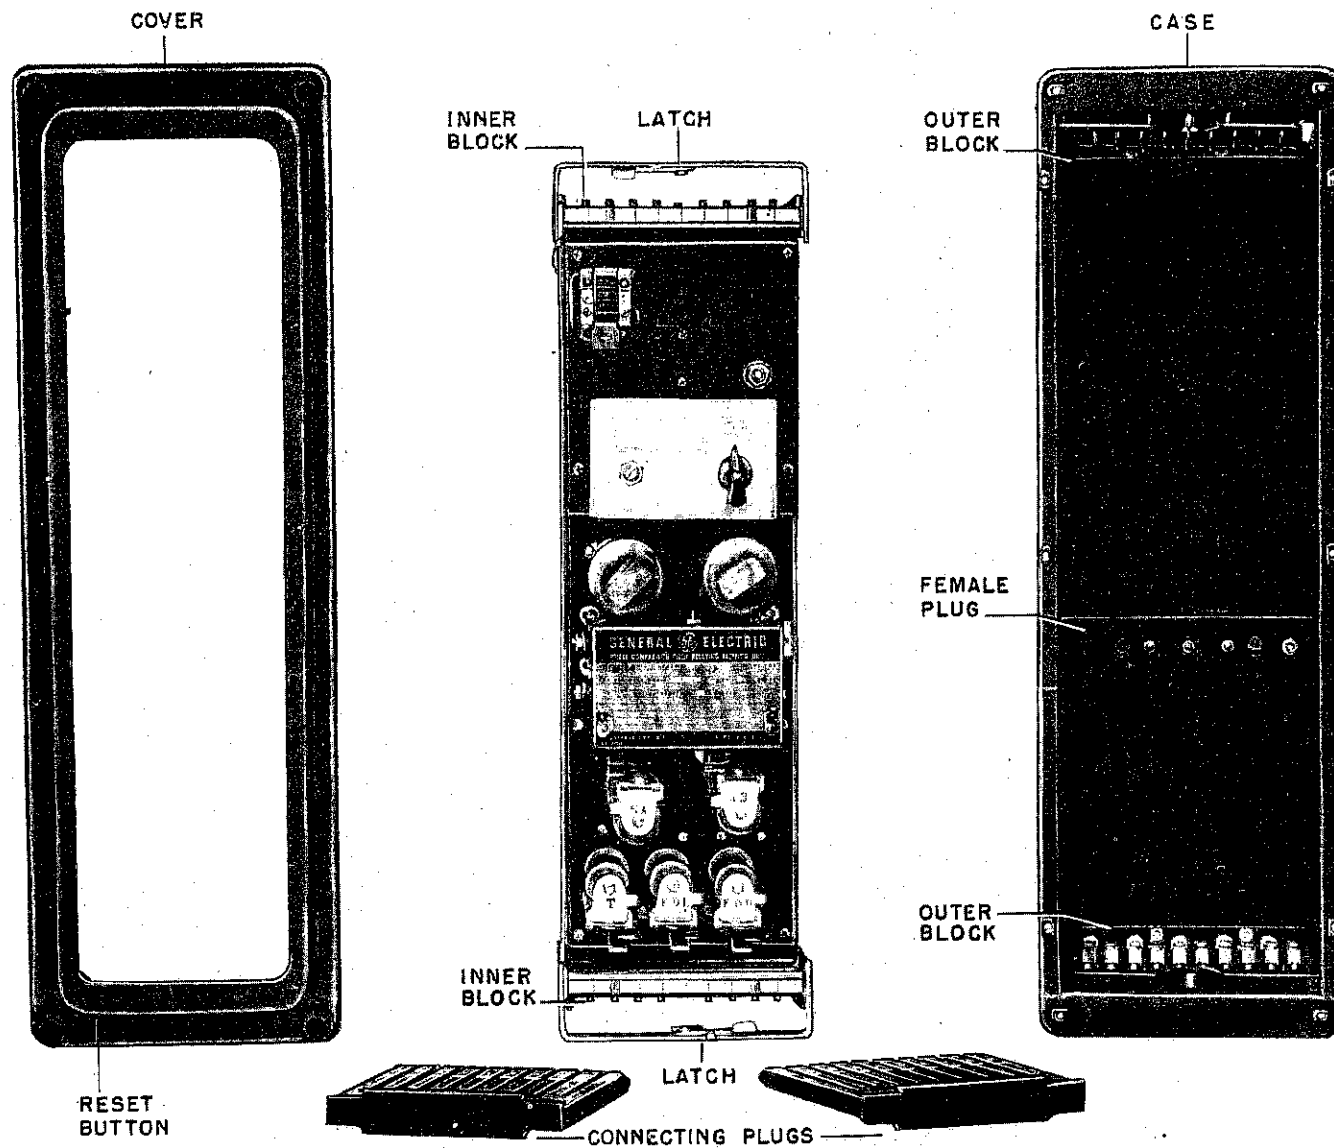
The Tripping Unit Of The Type EDD Relay Disassembled
